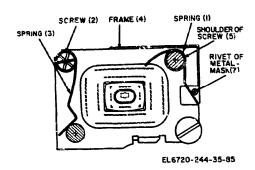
Spring location (springs (1) and (3) from fig. 3-7).
